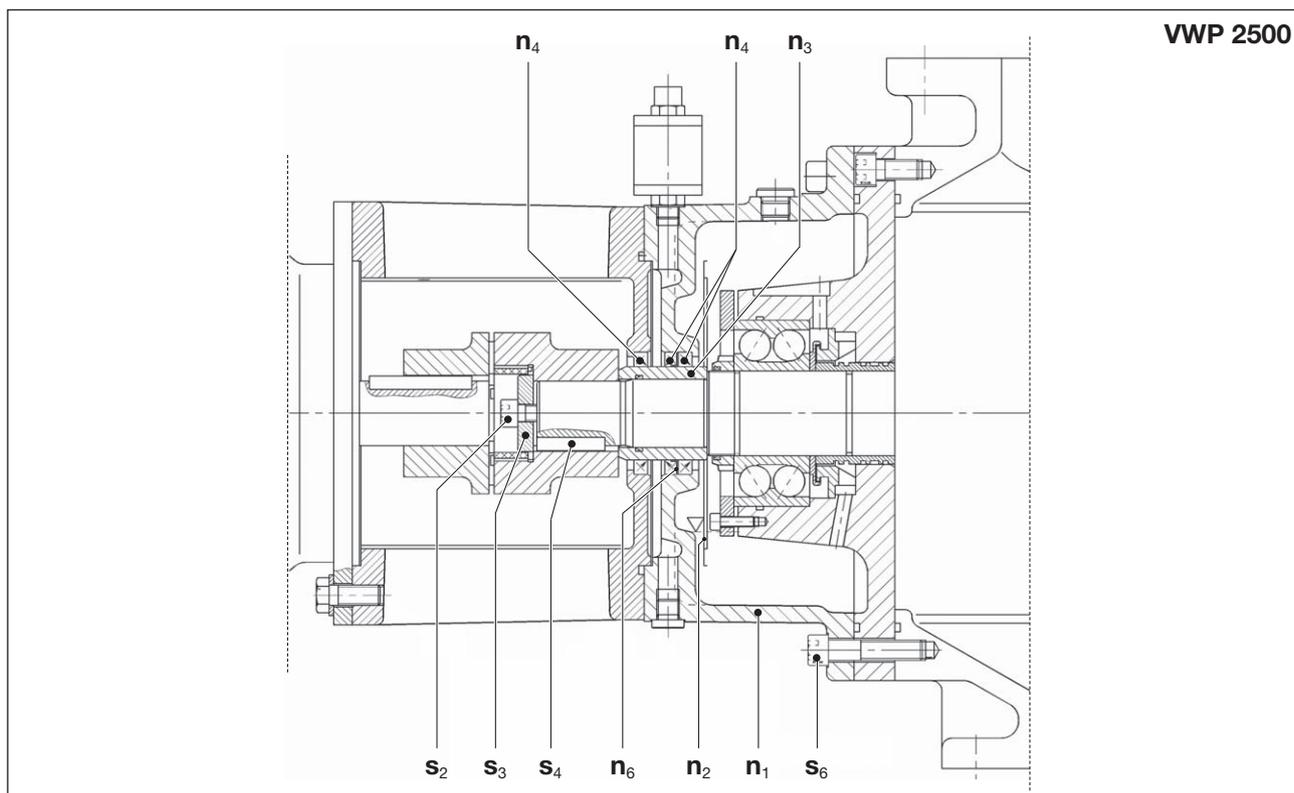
Changing of the shaft sealing rings and the shaft wearing sleeve VWP 2500
